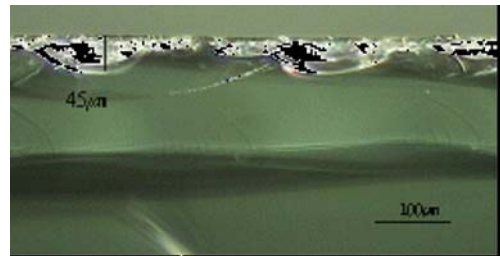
Section view of cut surface by wheel scriber without vibration input
